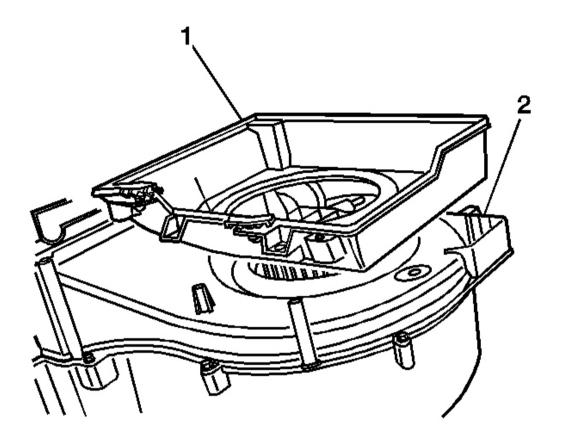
Lower Recirulation Housing Courtesy of GENERAL MOTORS CORP.
